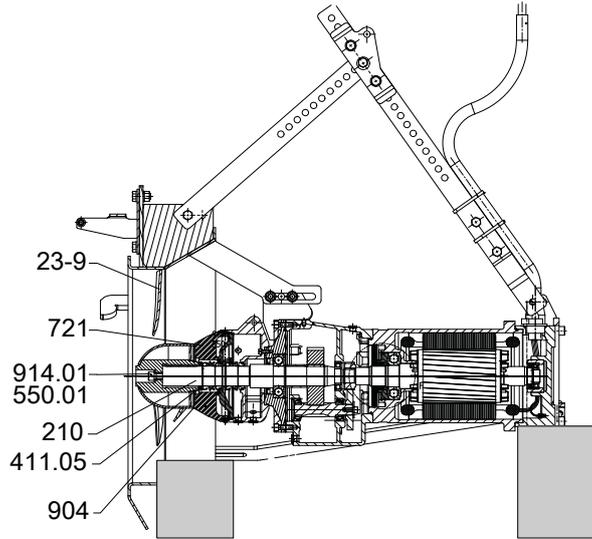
Mounting the axial propeller of an Amaline 500, 600
